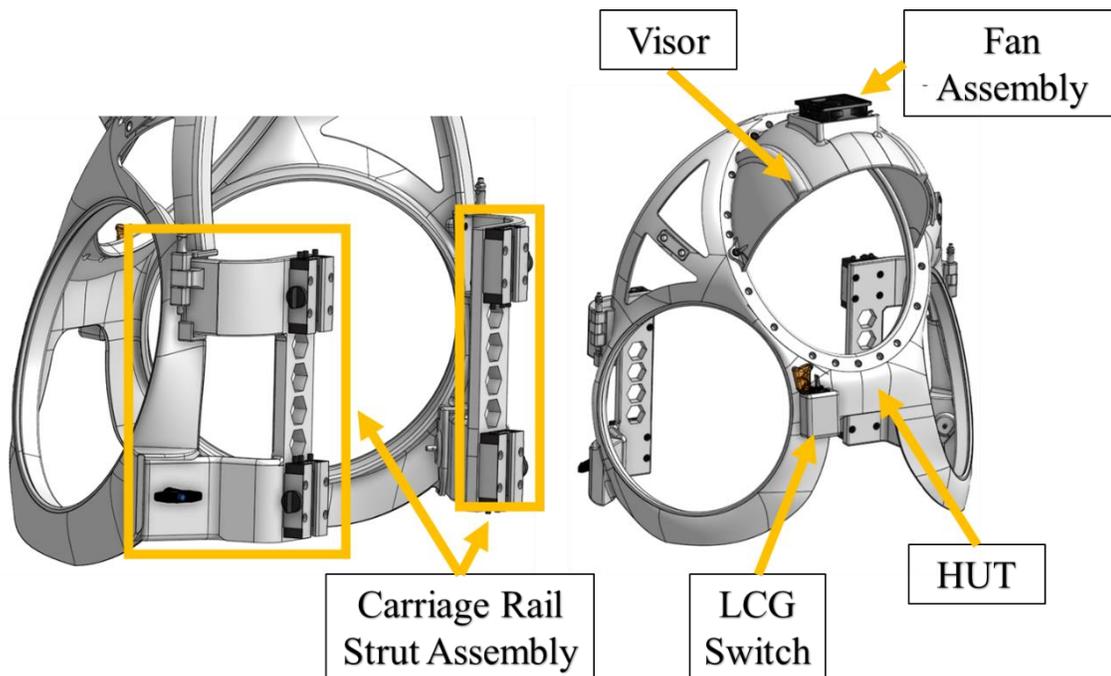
Hard Upper Torso (HUT) Assembly and Subsystems
